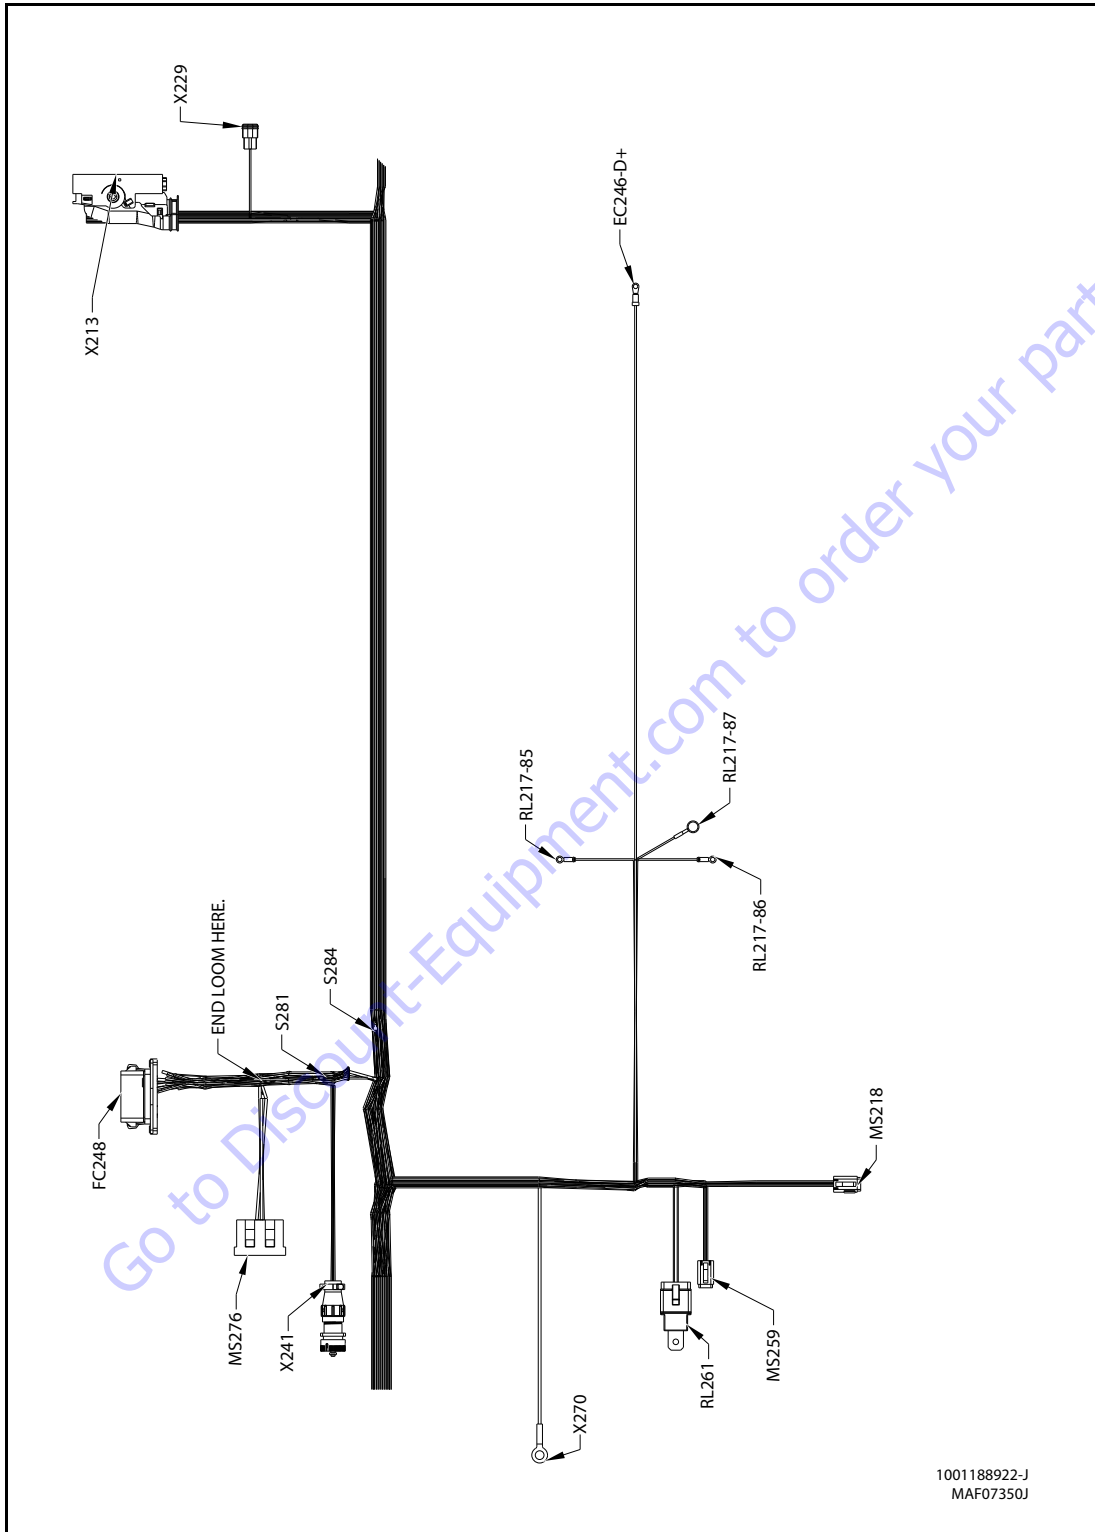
T4F Engine Harness - Sheet 7 of 14
